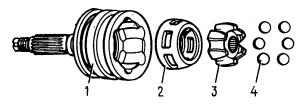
Front Wheel Drive Outer Joint Parts:
